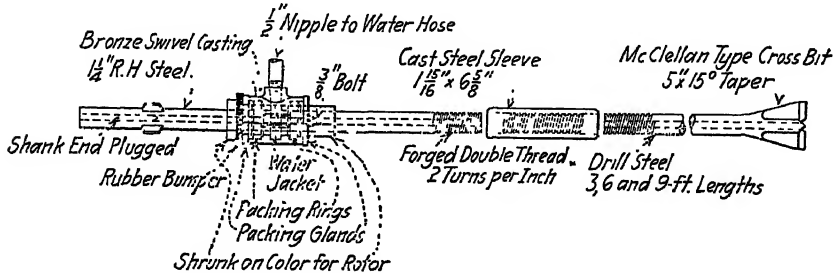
SWIVEL AND STEEL ASSEMBLY FOR DEEP-HOLE DRILLING WITH HAMMER DRILLS.
